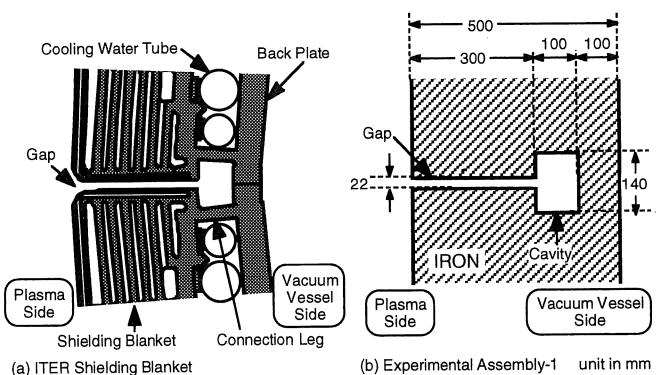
Section view of the ITER shield blanket modules and the experimental assembly-1.
